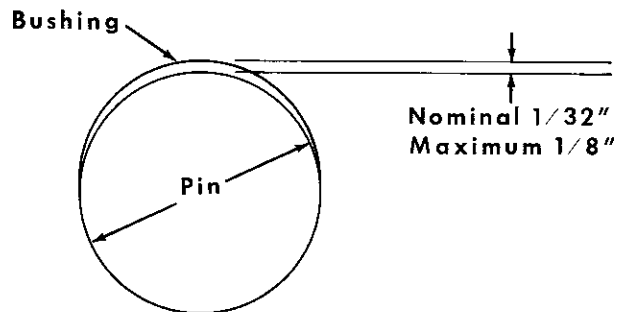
Swing Hanger Pin And Bushing Wear Limit
